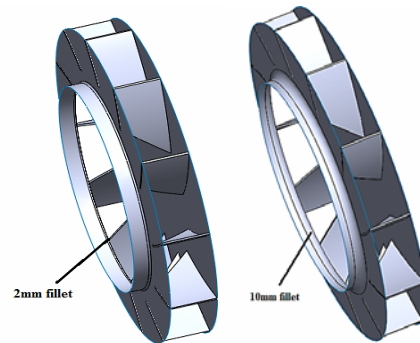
Fillet radius of 2mm and 10mm at inlet to the impeller.
